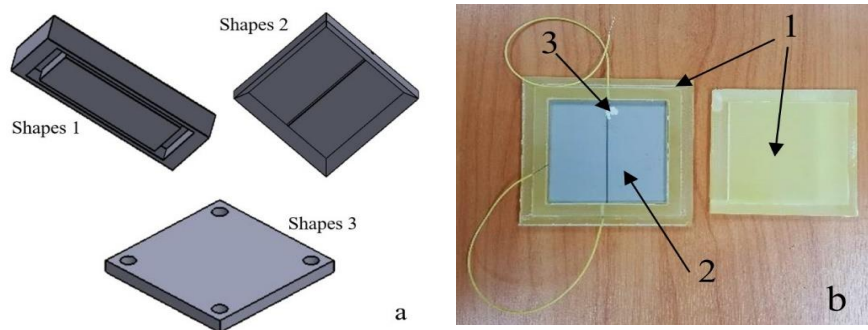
(a) Designed PZT assembly (upper part); (b) Protective part (1), piezoelectric sheet (2) and wires connected to silver paste (3)
